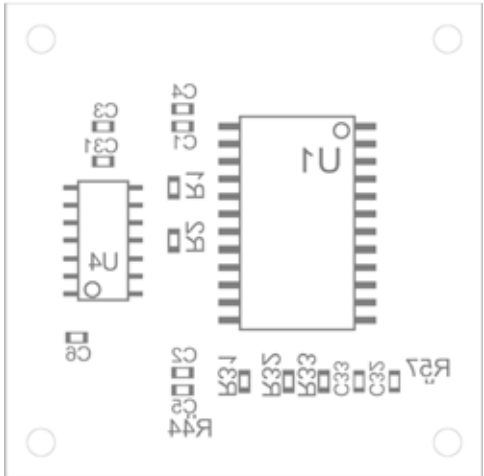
Zoomed view (200%) of the sensor board PCB bottom component placement.
